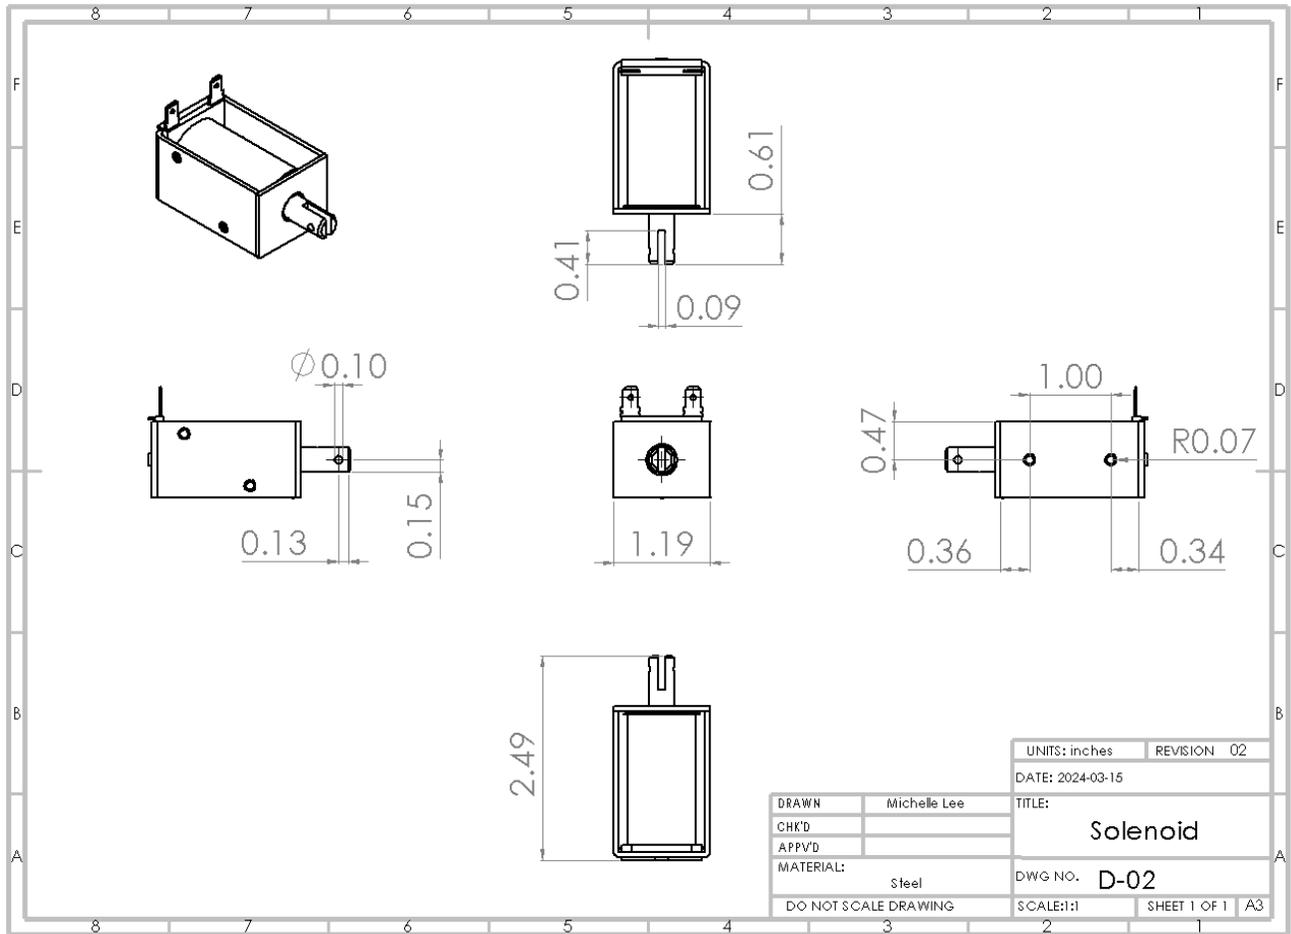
Dimensions of McMaster-Carr solenoid in inches
